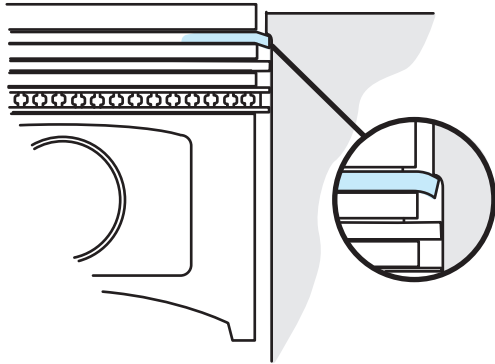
If the ridge at the top of a cylinder is not removed, the top piston ring could break the second piston ring land when the piston is pushed out of the cylinder during disassembly, or the second piston ring land could break when the engine is first run after reassembly with new rings.
